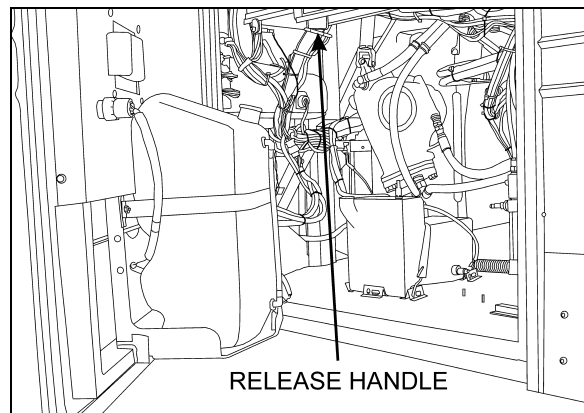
FRONT BUMPER RELEASE HANDLE 18613
